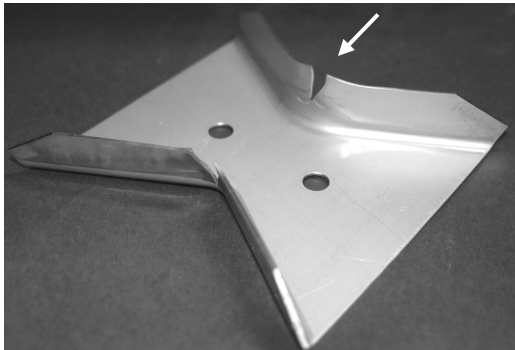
Fracture at stretch flanging test for  $R = 30$  mm and  $H = 25$  mm
